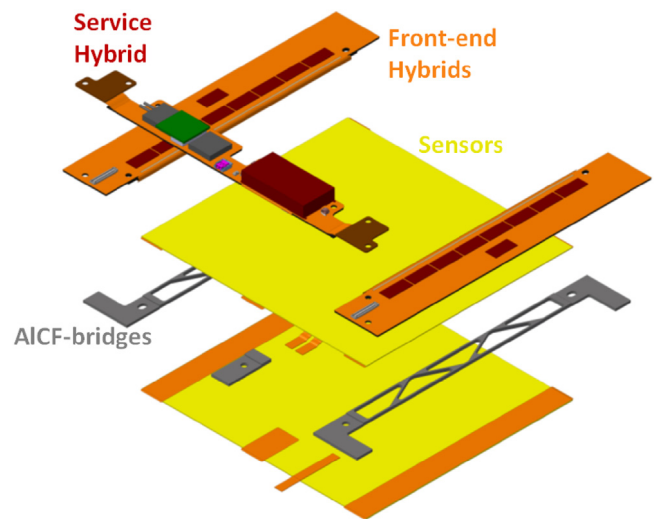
Drawing of the 2S module type. Shown is the exploded view of parts as they need to be assembled at the module assembly sites. Source: Adapted from [5].
